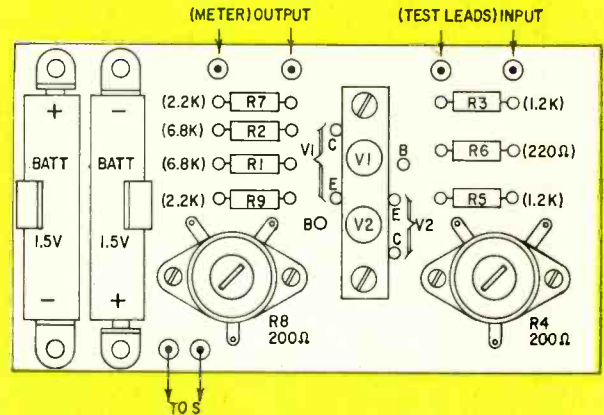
Parts layout on the printed board. If you are not using a printed board, use the same layout on a perforated phenolic board.
